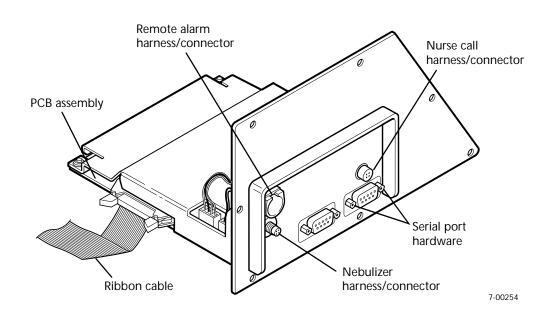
Disassembling Communications option assembly (remote alarm, nebulizer, nurse call, and serial port hardware)
